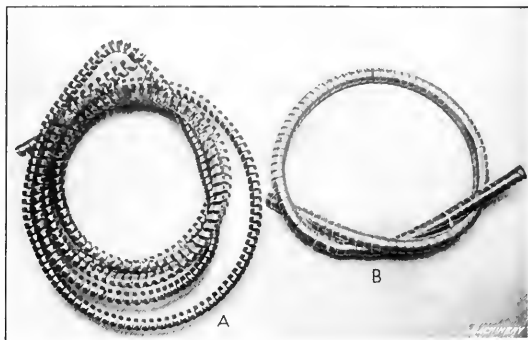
Character of Chips removed with a Stellite Tool in the Lathe. Note Smooth Finish on Under Surface of Chip
